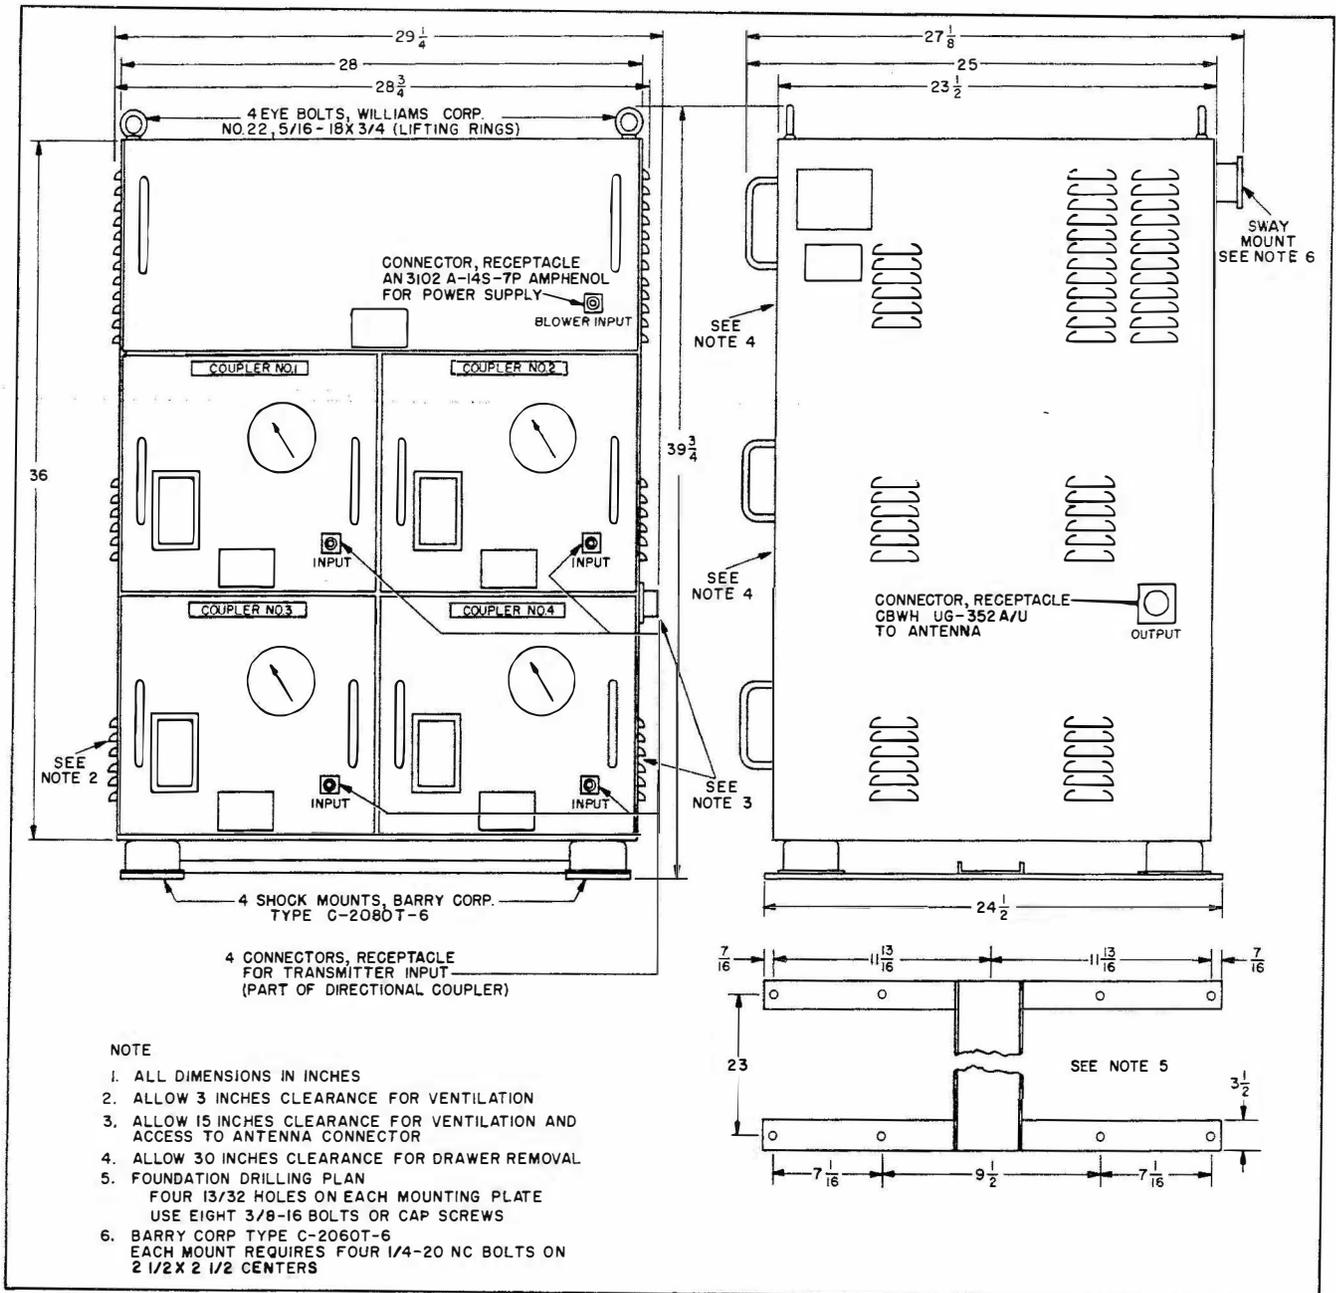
Antenna Coupler Group AN/SRA-16, Outline and Mounting Dimensions
